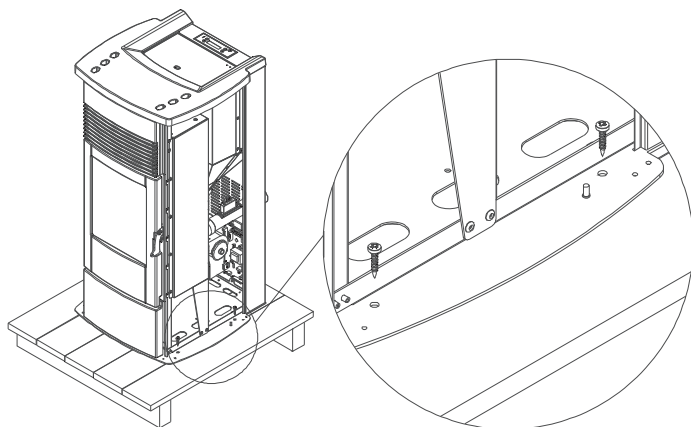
REMOVAL OF PACKAGING SCREWS
